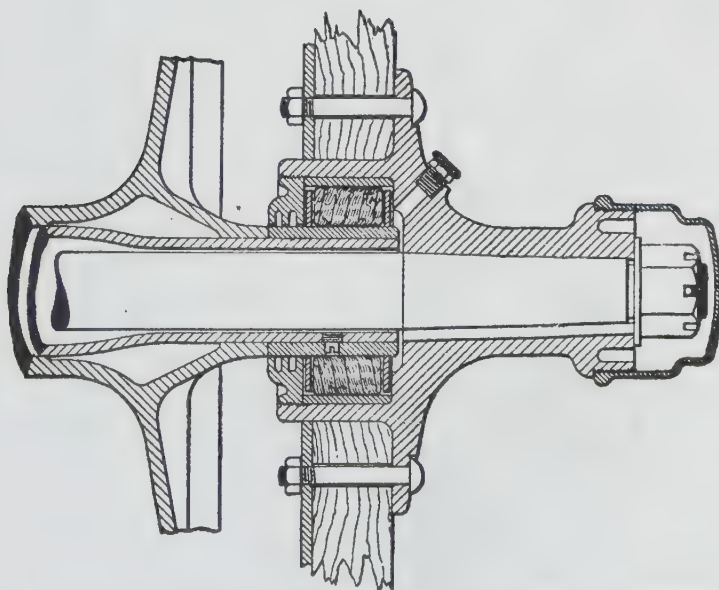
DRIVING WHEEL HUB ON HYATT ROLLER BEARING.
